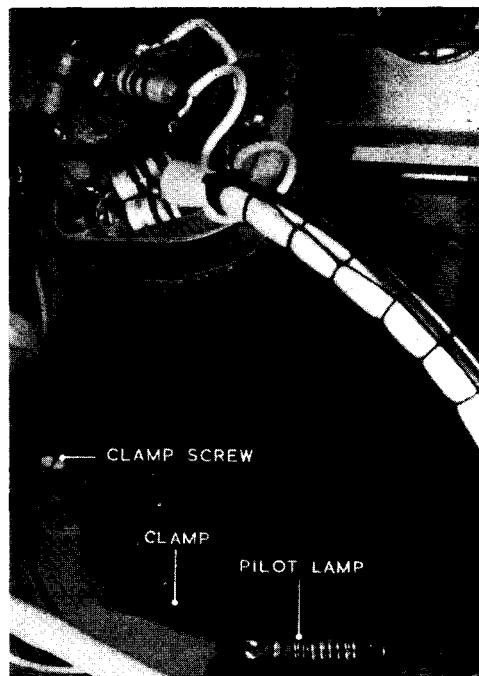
CATHODE RAY TUBE ASSEMBLY.
